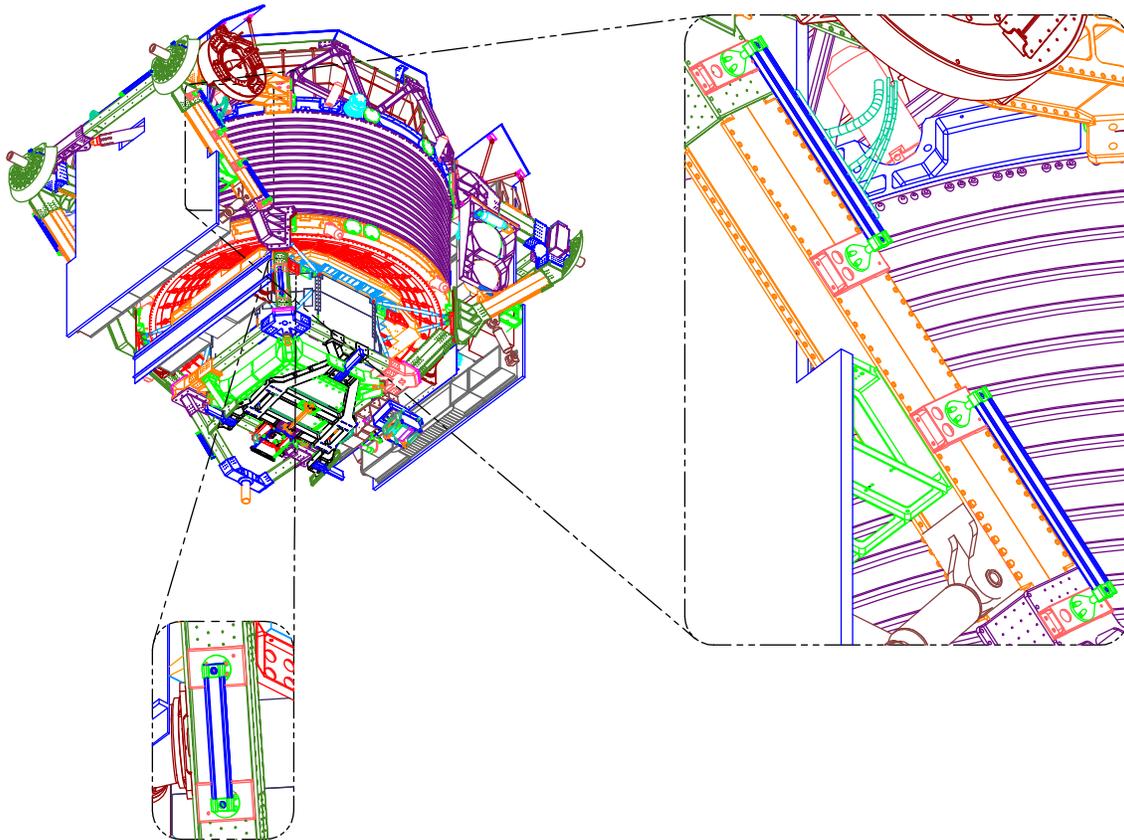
EVA Handrails Used To Access WIF Socket On-Orbit
